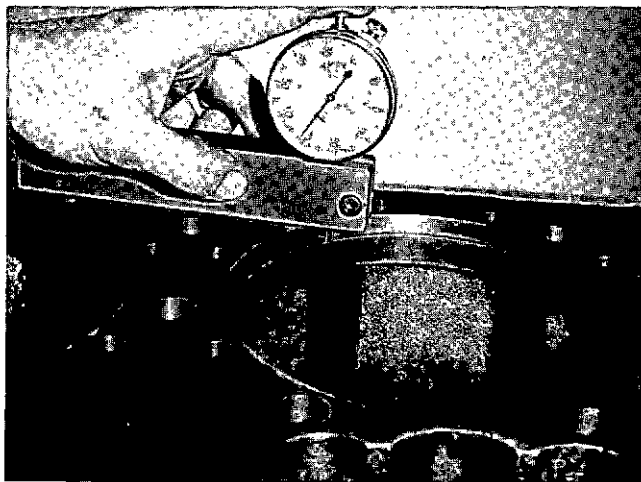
, V40124. Checking liner counterbore depth in block
